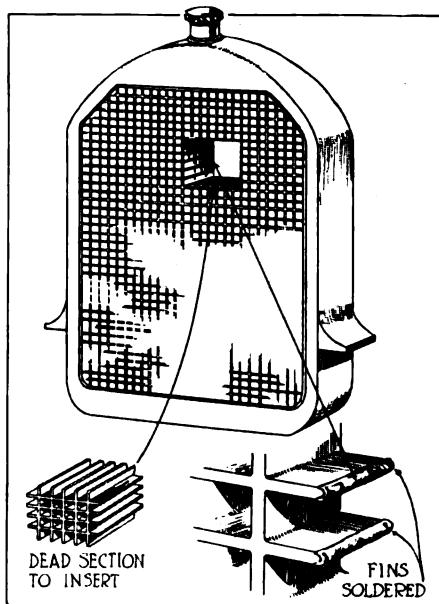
The leaky section is cut out, the edges soldered up to prevent leakage, and then a dummy section is soldered in place
